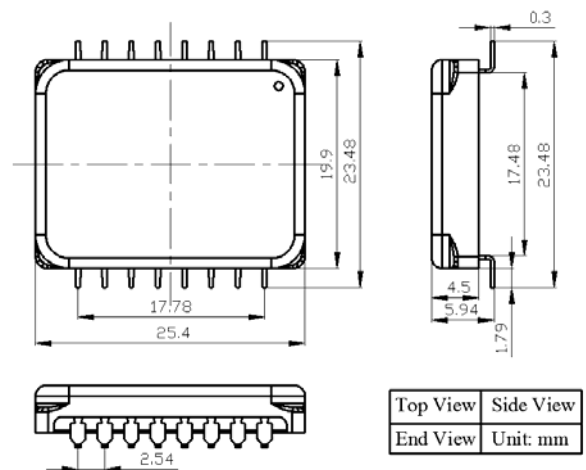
Dimensions of the SMT Package Controller of TECA1-xV-xV-S
